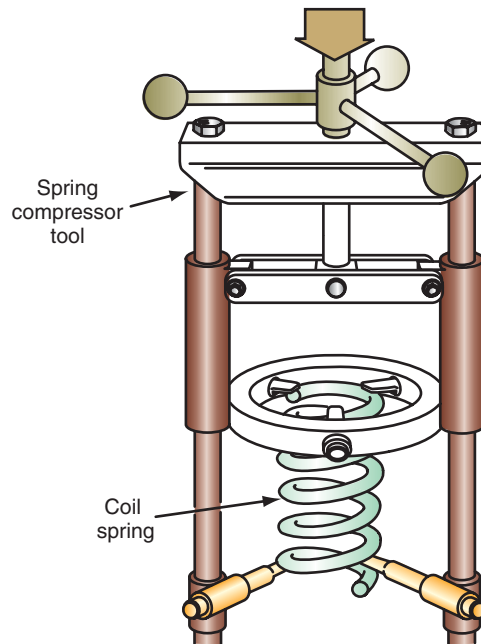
After the compressing tool is operated to remove all the spring tension, remove the strut rod nut.
